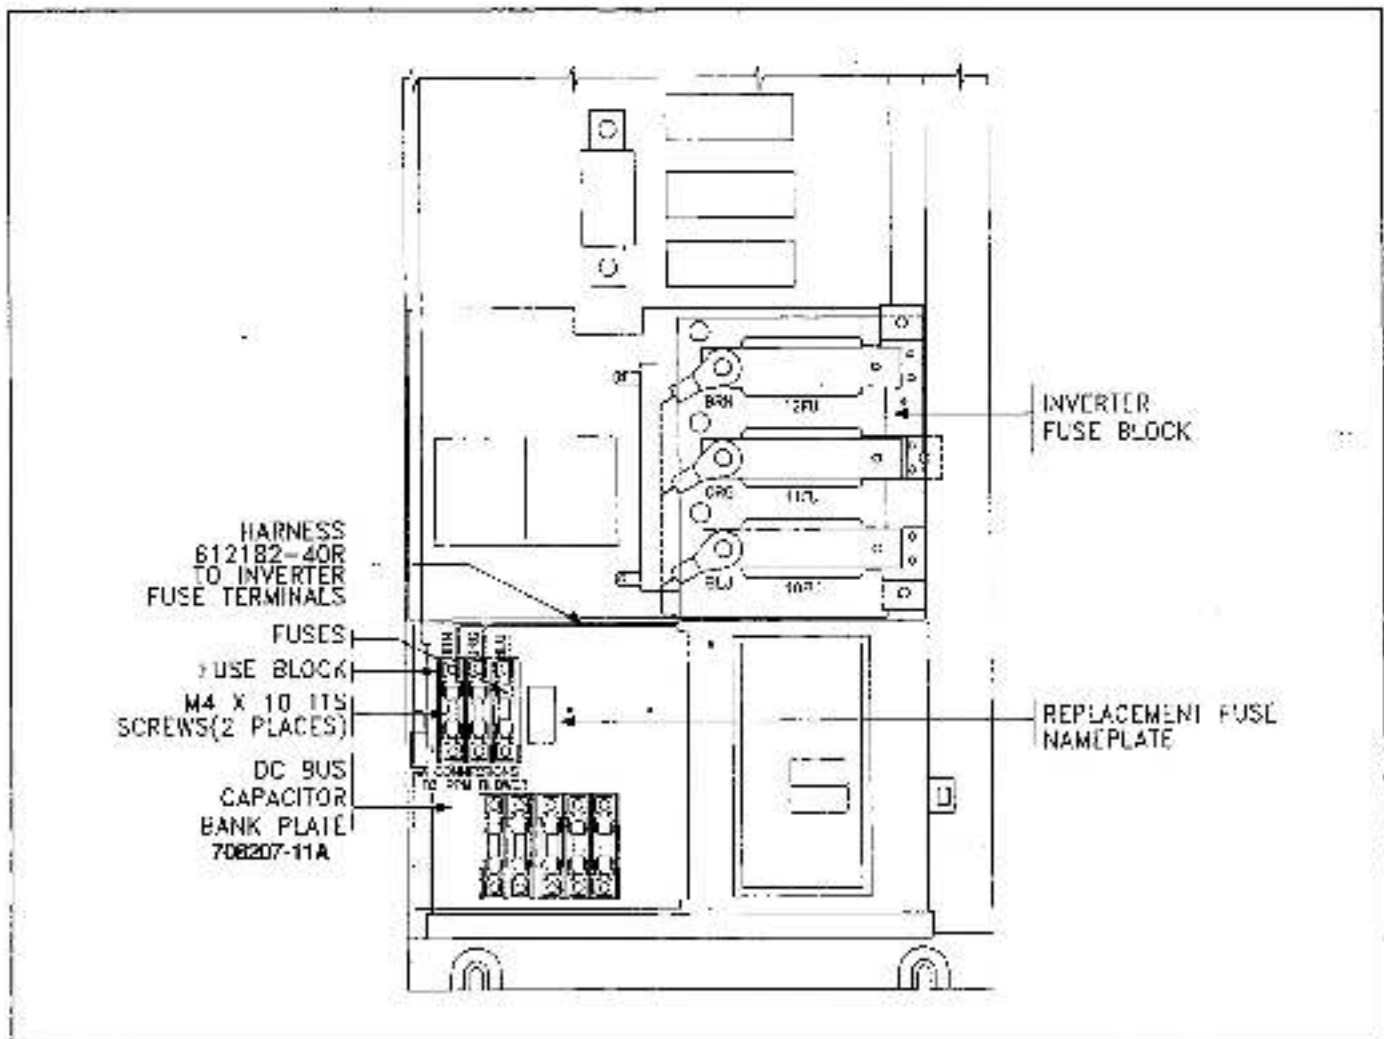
Fuse Block Mounting Location and Connection Diagram (50-100 HP GP2000 and 60-100 HP YTAC V Controllers).
